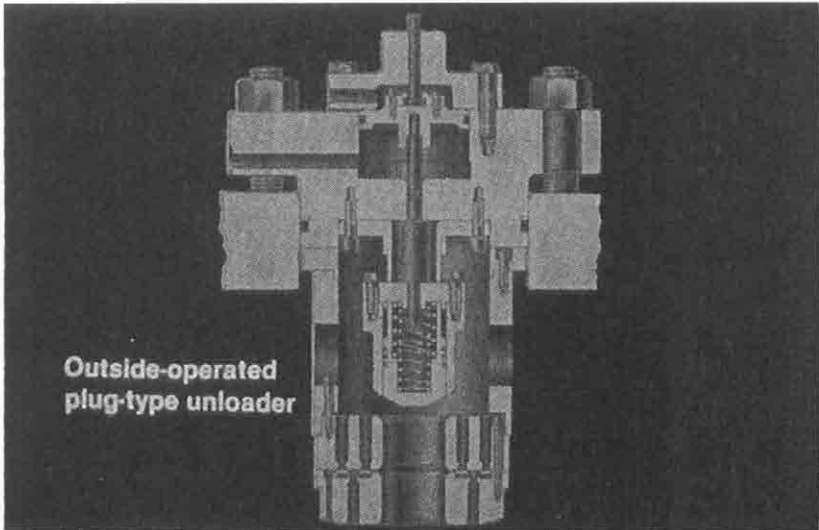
Plug type unloader. (Courtesy of Dresser-Rand)
